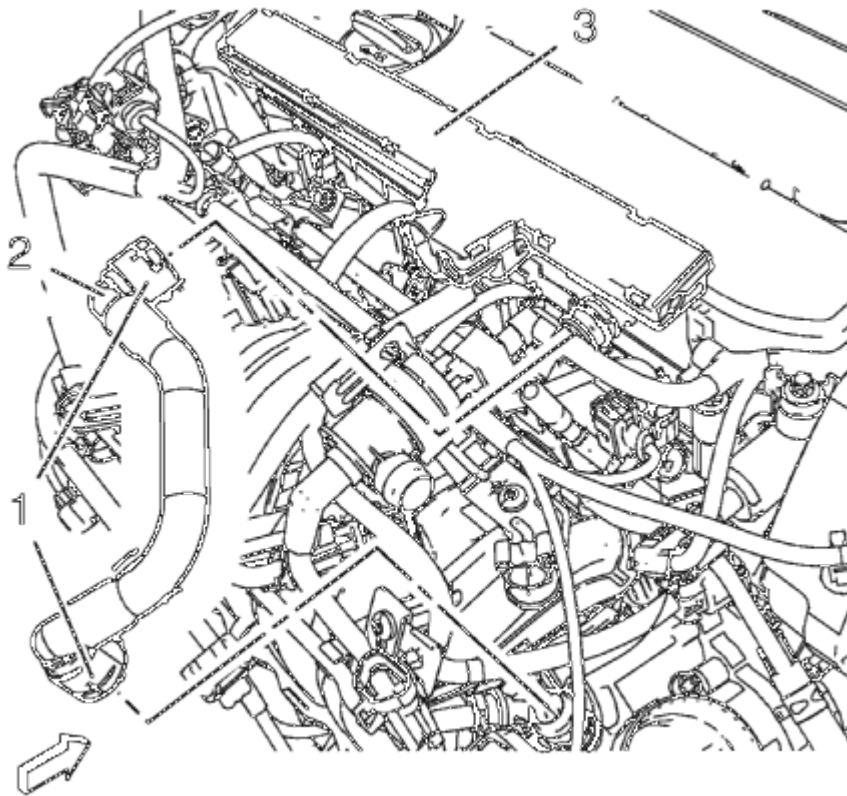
Positive Crankcase Ventilation Tube, Connectors And ECM Wiring Harness Guide
